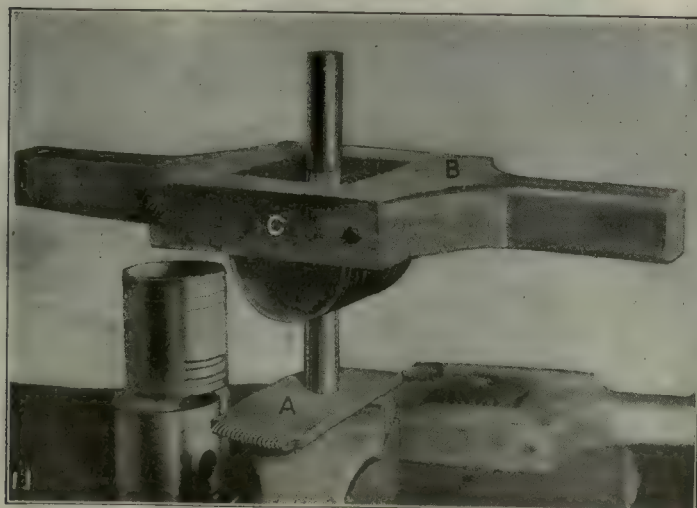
HAND-REAMING PISTON-PIN HOLES
